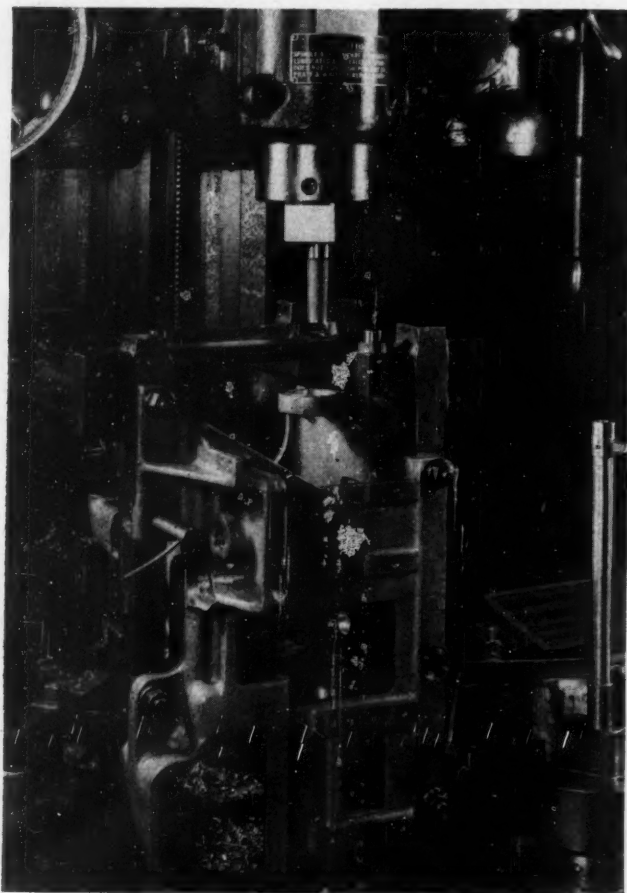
Below—Aluminum stud jig bored to limits shown on a production basis required but 6 minutes per piece
